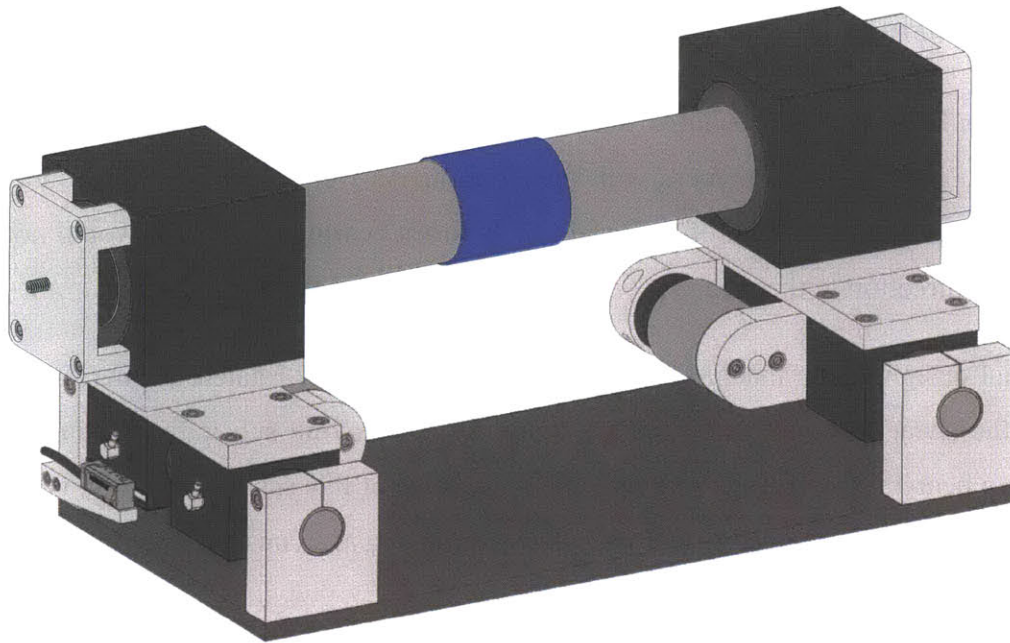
Print head construction: Diagram of the complete print head assembly. Altogether, the print head is able to actuate the stamp in the y and ψ axes, while the θ axis is free to rotate.
